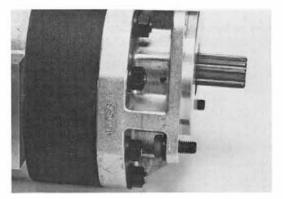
Install Hardware (Pumps with C4 Flange)
